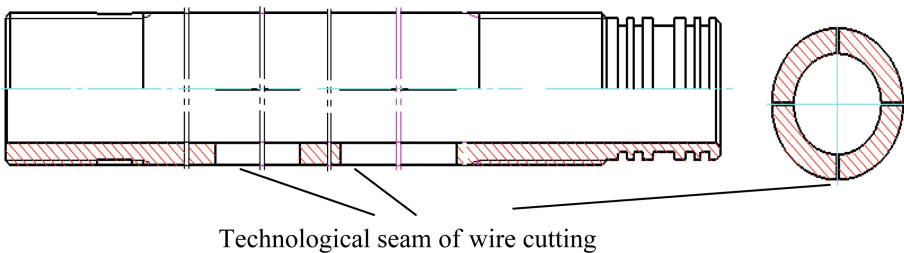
Schematic drawing of sand filter and pressure transmitting channel
